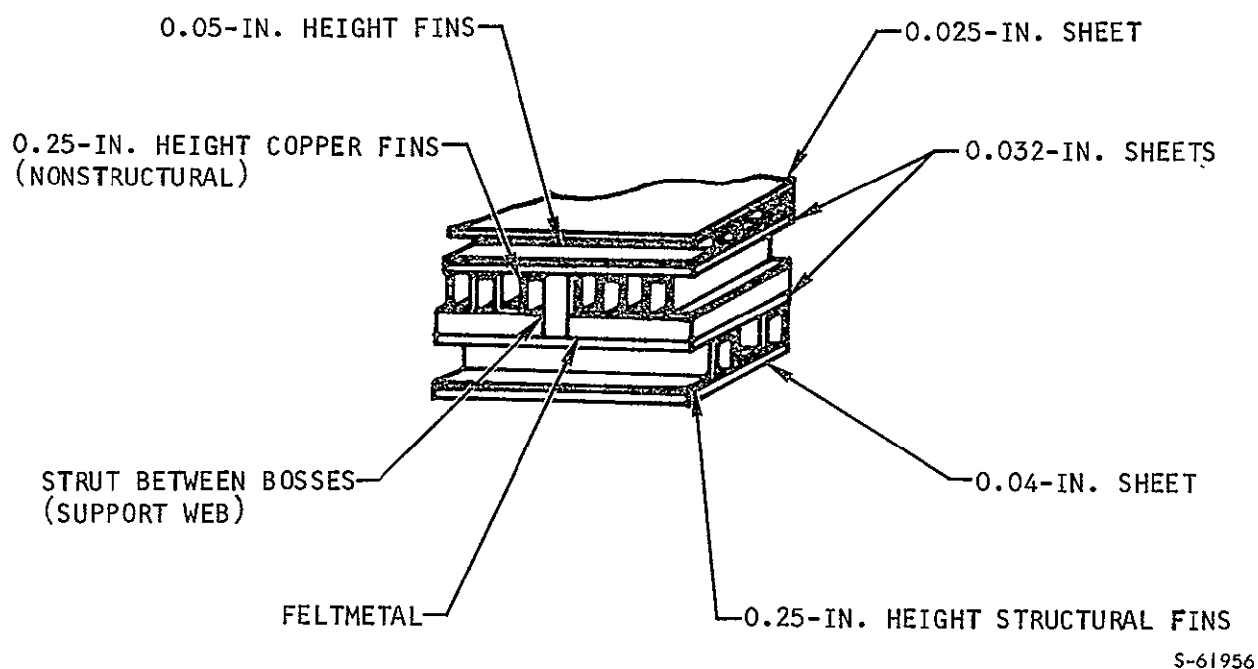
Instrument Unit Thermal Panel Structural Schematic
